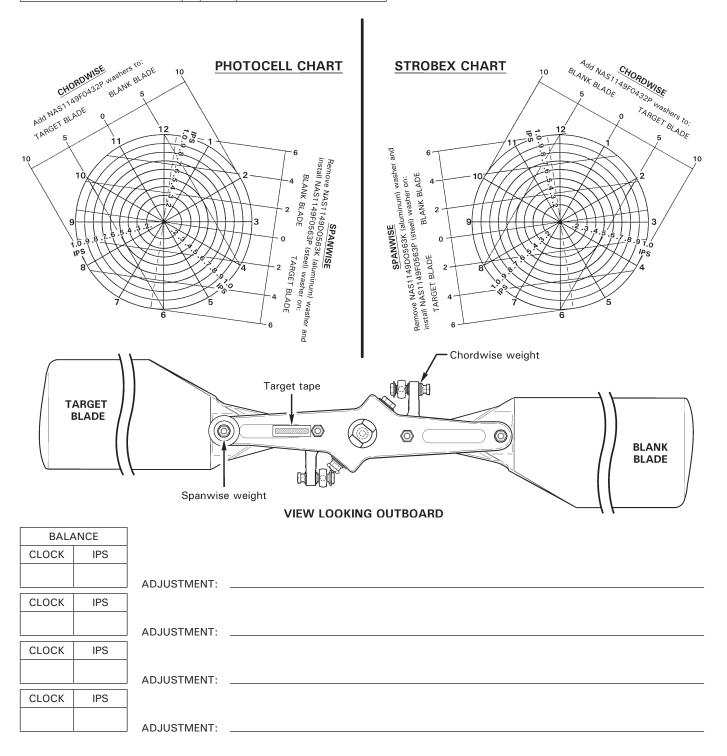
C008-4 TAIL ROTOR ASSEMBLY DYNAMIC BALANCE CHART
